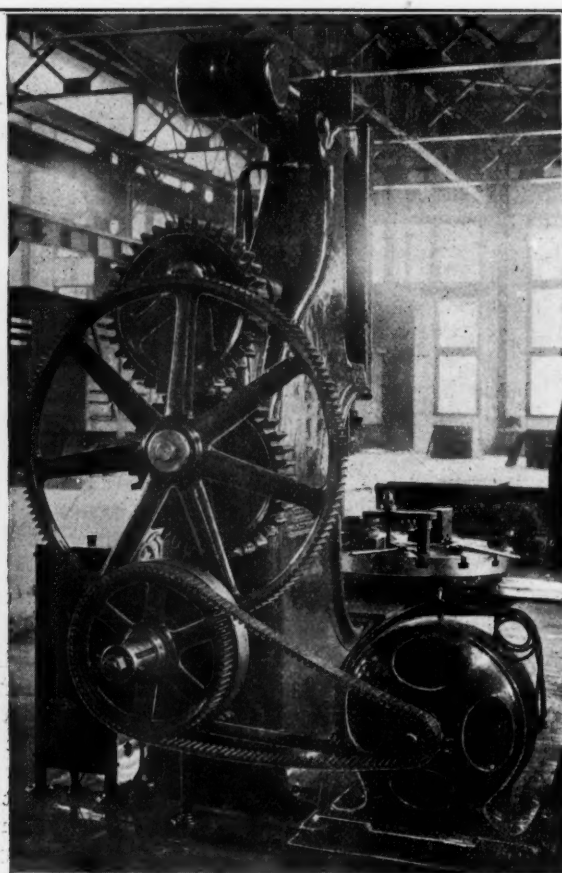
VIEW SHOWING DETAILS OF THE MOTOR-DRIVE ARRANGEMENT.—13-H.P. CROCKER-WHEELER MOTOR.
